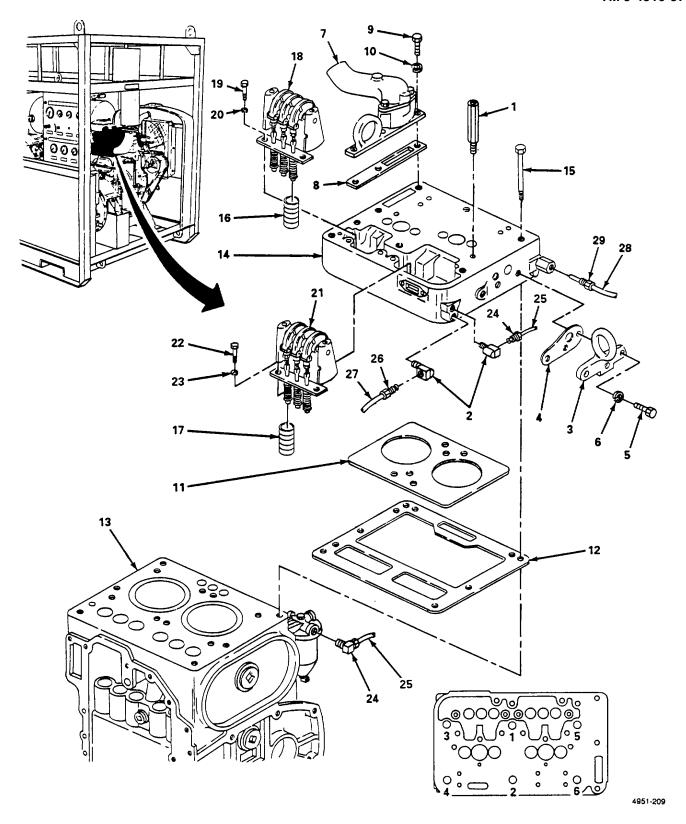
Cylinder Head, Install. 5-69/(5-70 blank)
